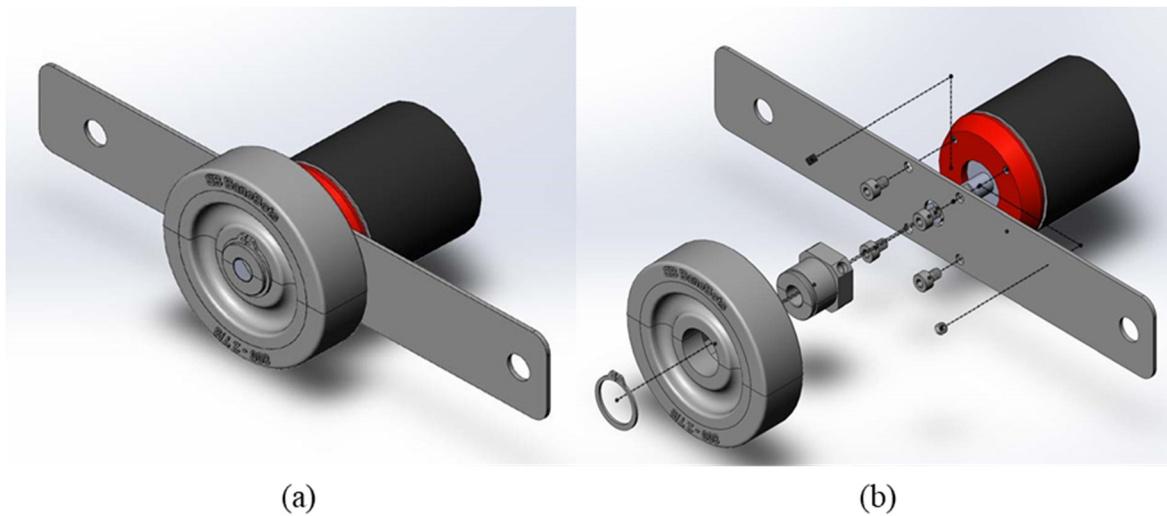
(a) The motor assembly as designed; (b) the exploded assembly view of the design.
